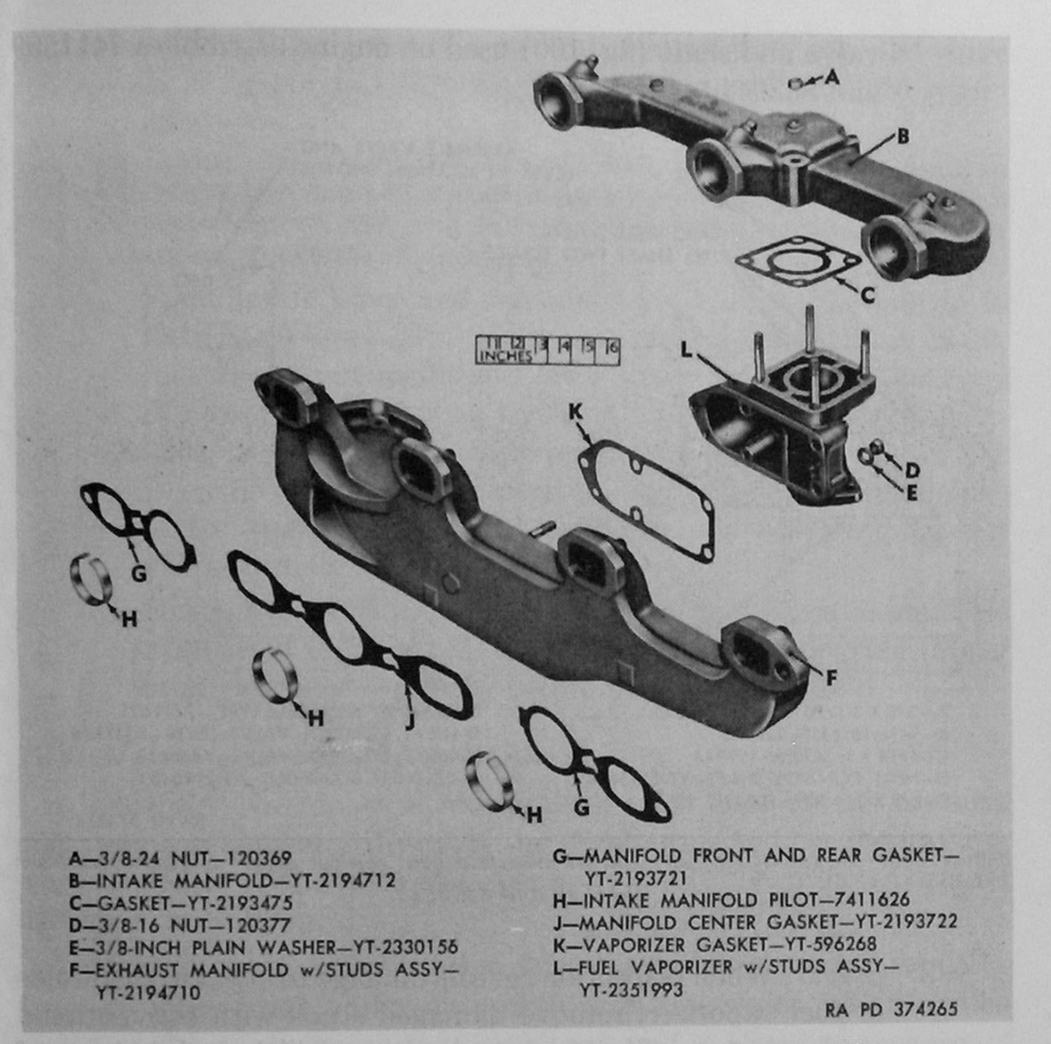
Intake and exhaust manifold components—engine assembly 8726920.
